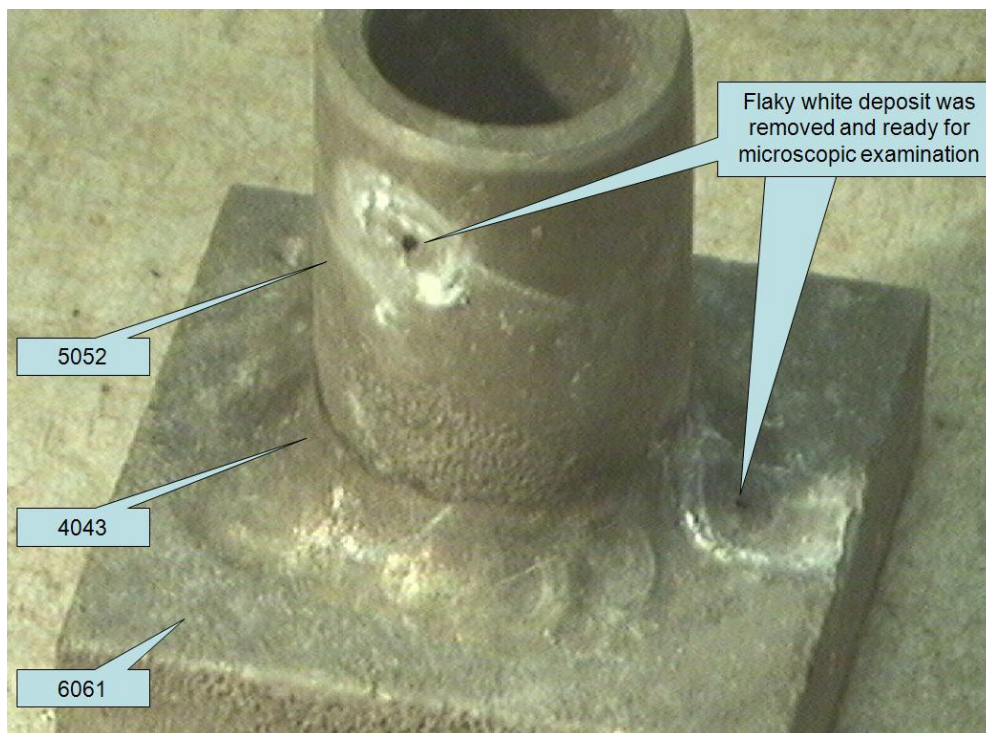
Aluminum Welded Assembly in Solution 3 after 171 Days
